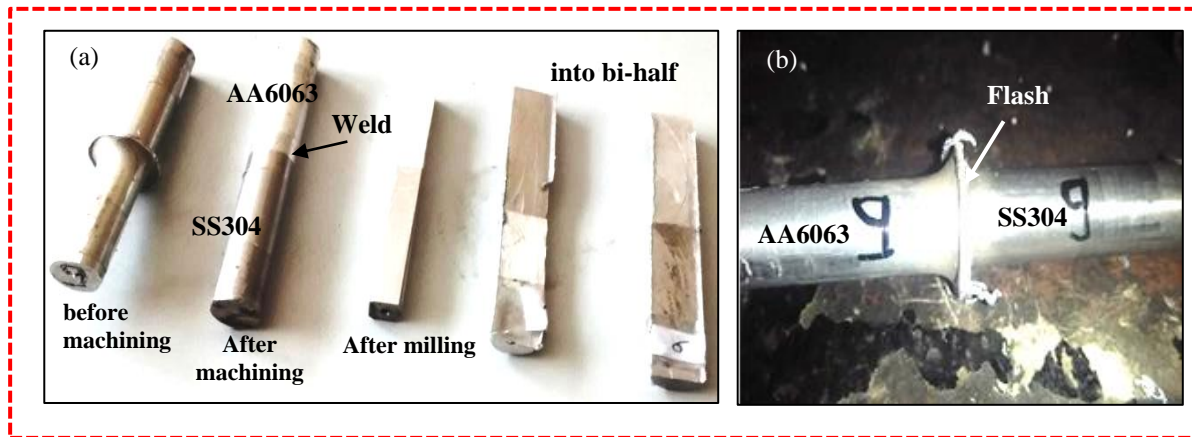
a) Friction welded bimetallic joints, b) flash formation
